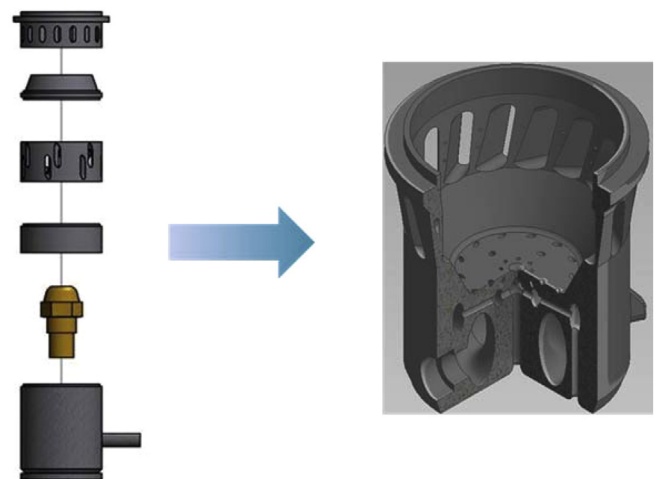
Example for SLM optimisation: An assembly consisting of 8 parts and different materials were redesigned and produced with SLM as one single part.
